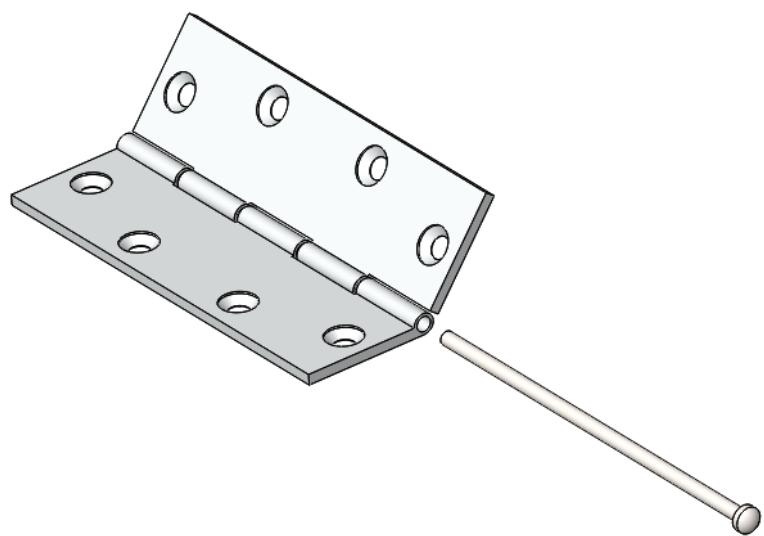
Ferrarer, Auston: Assembly Step 2
